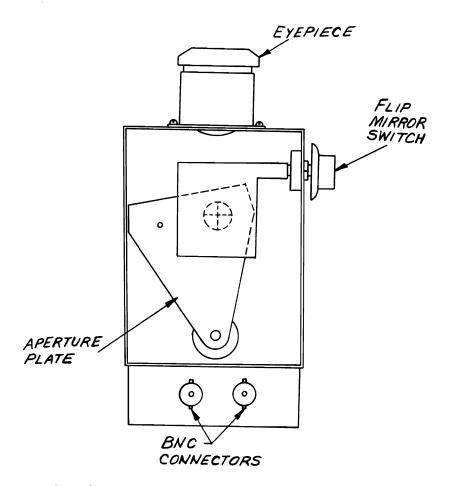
This cross-sectional view of the photometer head shows the aperture plate and flip mirror arrangement.
